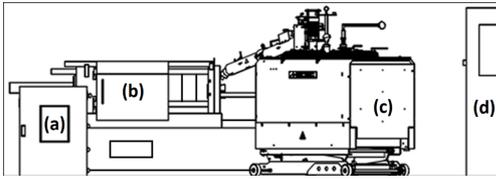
Schematic drawing of the components of integrated system: (a) control unit, (b) die casting machine, (c) melting furnace, (d) gas mixing unit.
